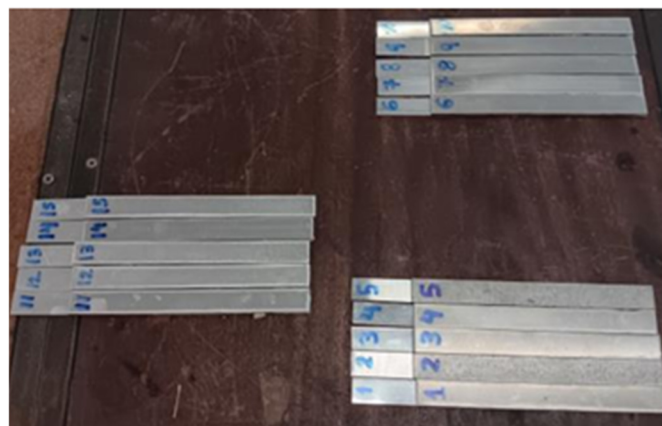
Some floating roller peel test specimens after removal of excess adhesive.
